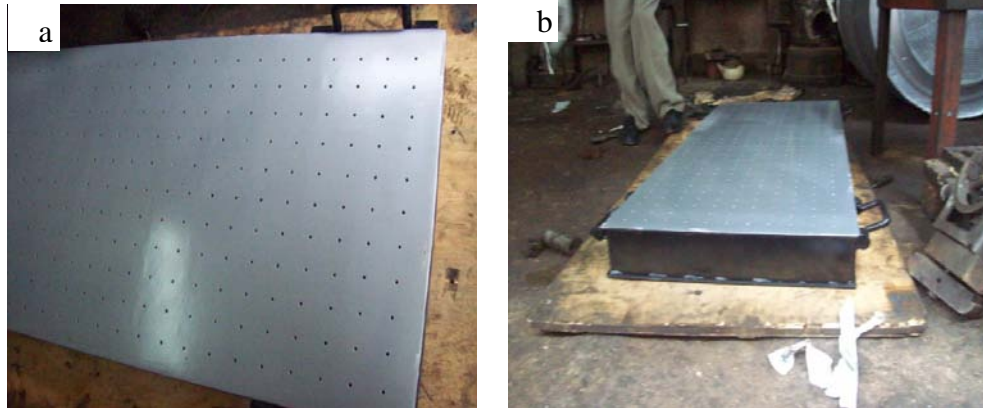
Completely painted and cleaned optical table ready for use: (a) a completely painted table top surface: (b) finished optical table for use.
